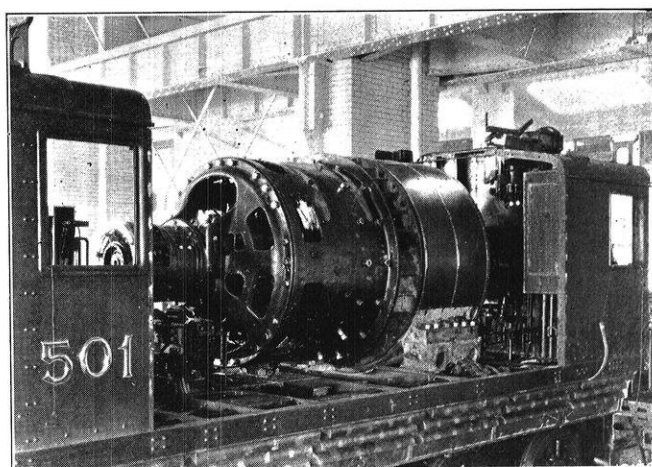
D. T. & I. Locomotive showing sides and roof removed
